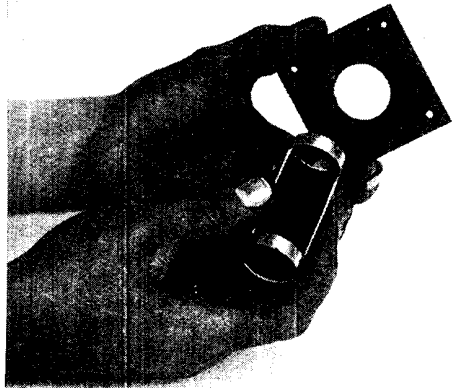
Attaching the fixed plate to the panel plate. The latter is of ebonite, and makes a close fit with the end of the tube
